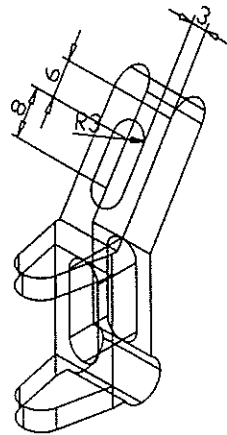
Third sketch extruded to cut, fourth sketch constructed
